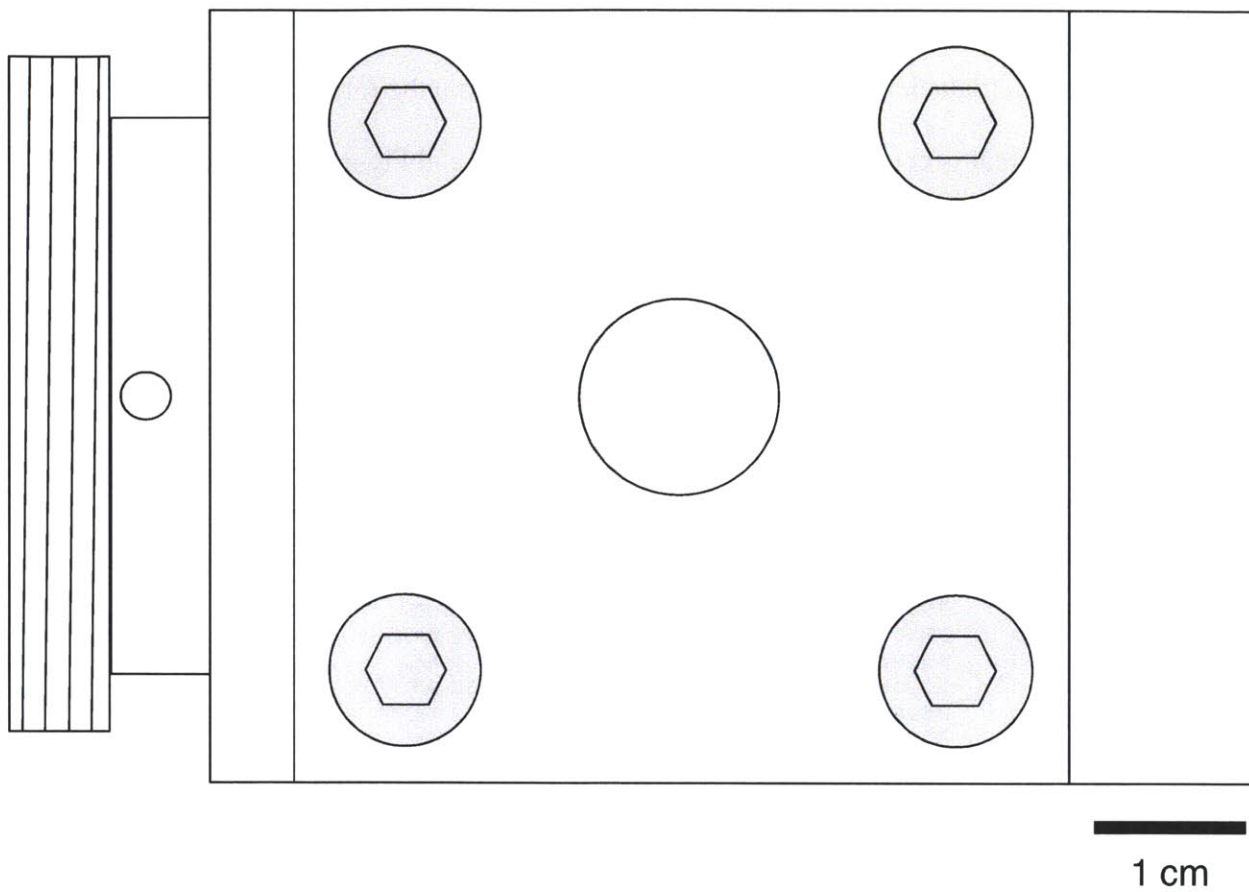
Top view of diaphragm cell showing the electrode support piece bolted to the top of the diaphragm cell. The threaded interfacing piece which screws into the threaded collar from the other diaphragm cell is shown on the left. The small hole is for insertion of a metal rod which allows the interfacing piece to be removed from the body of the diaphragm cell.
